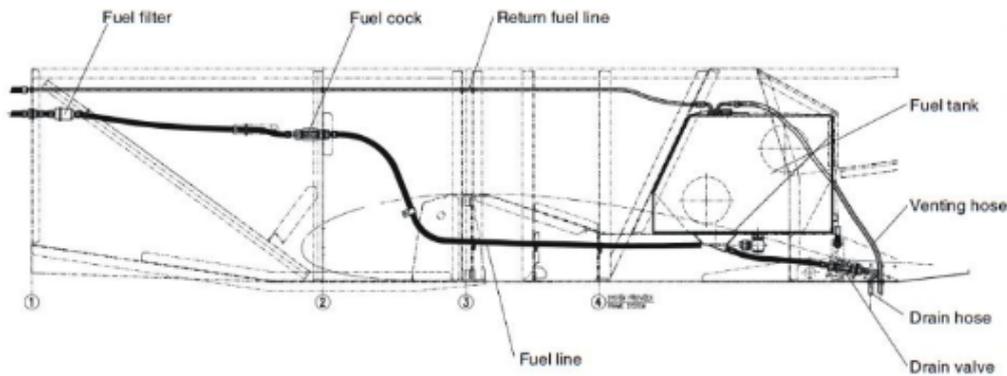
Fuel supply system designed by the aircraft manufacturer
